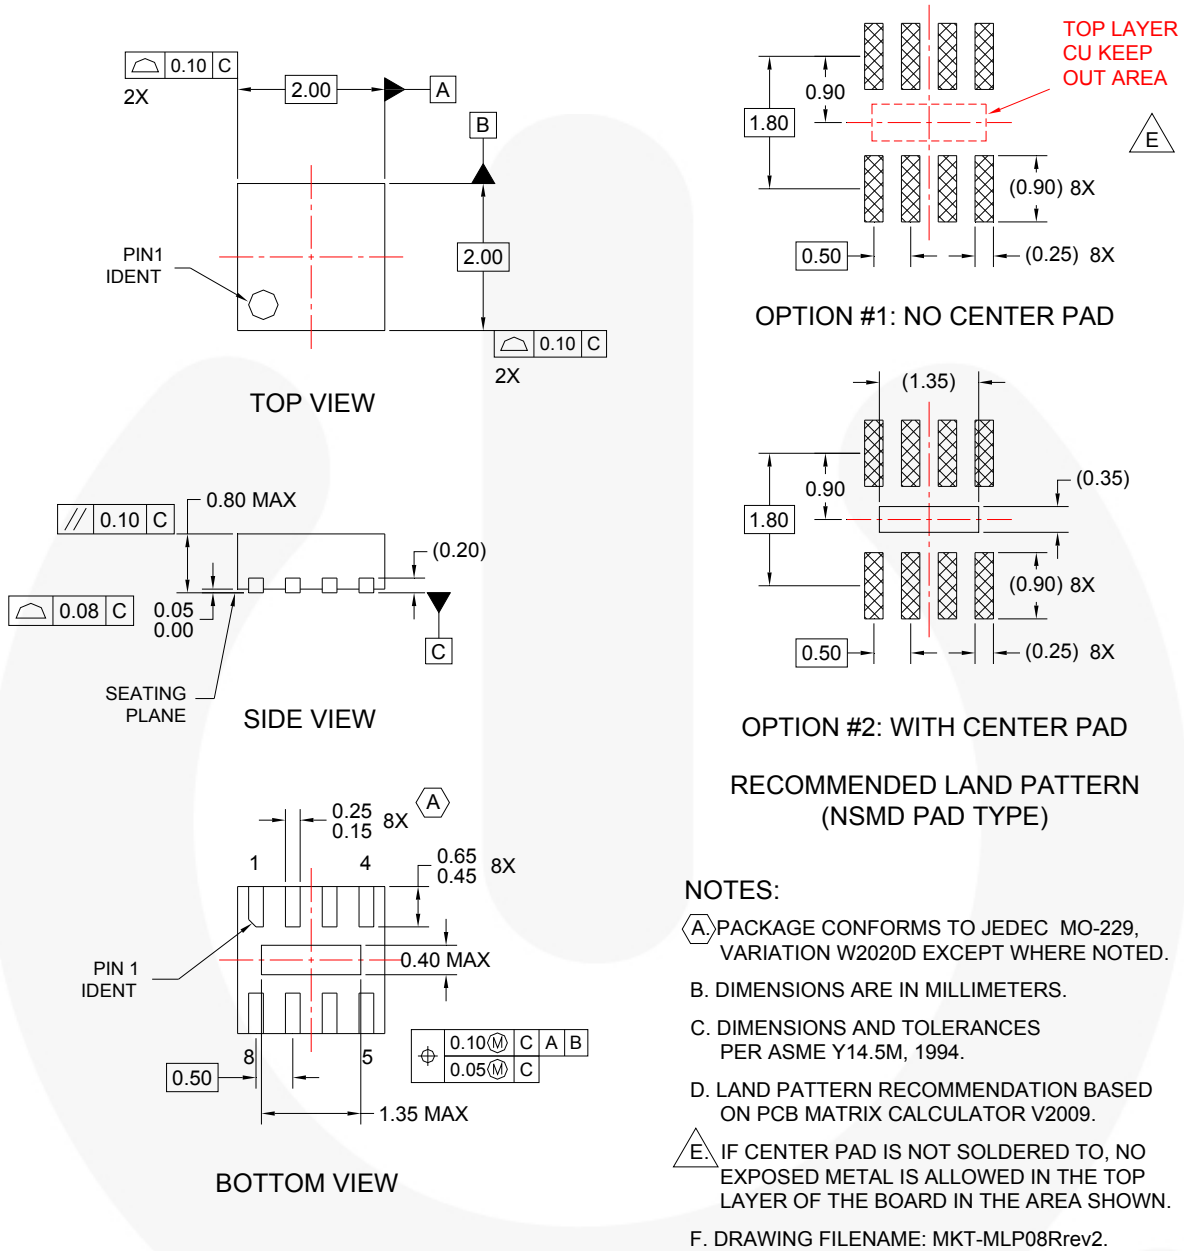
8-Lead, Molded Leadless Package (MLP), 2.0 x 2.0 x 0.8 mm
